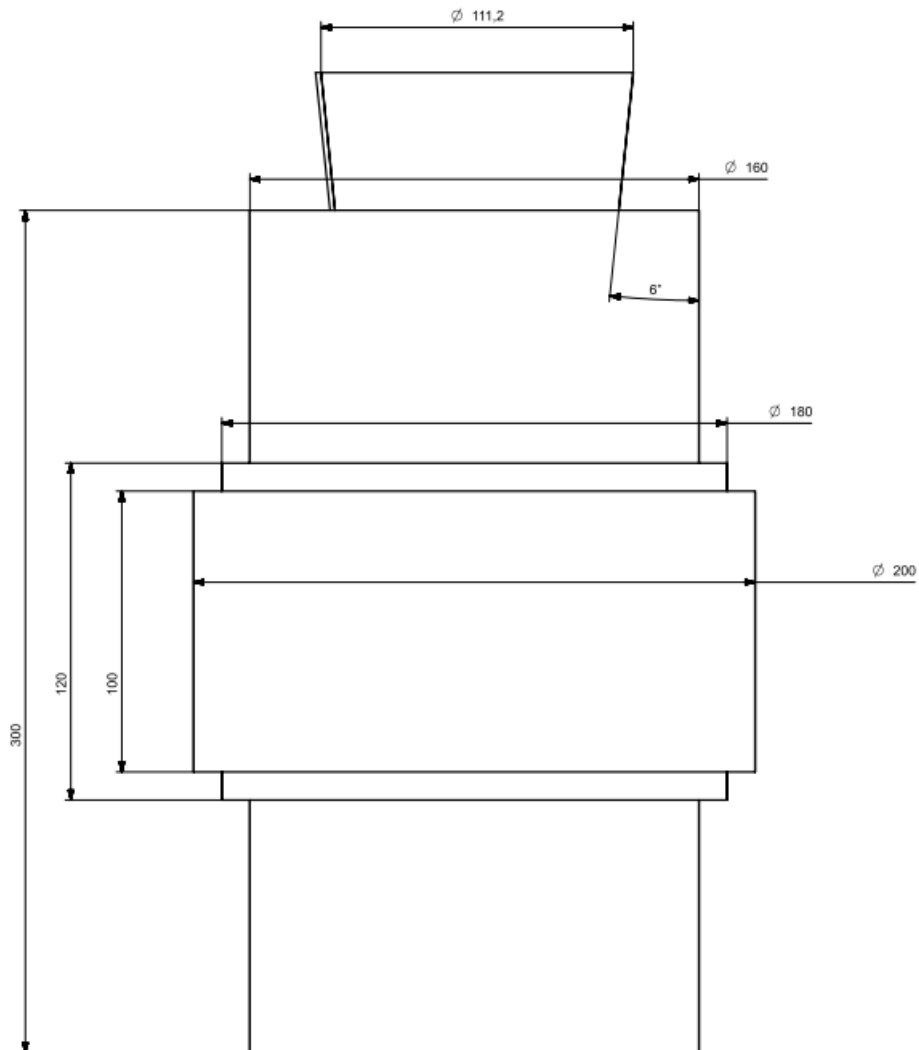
Technical drawing of the front view, showing the main dimensions of the ring test
